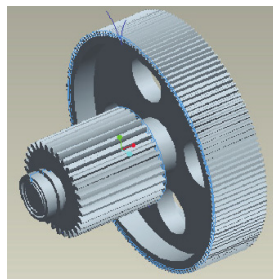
The virtual assembly of the middle shaft components of the two-stage gear reducer—spur gear in gear type
